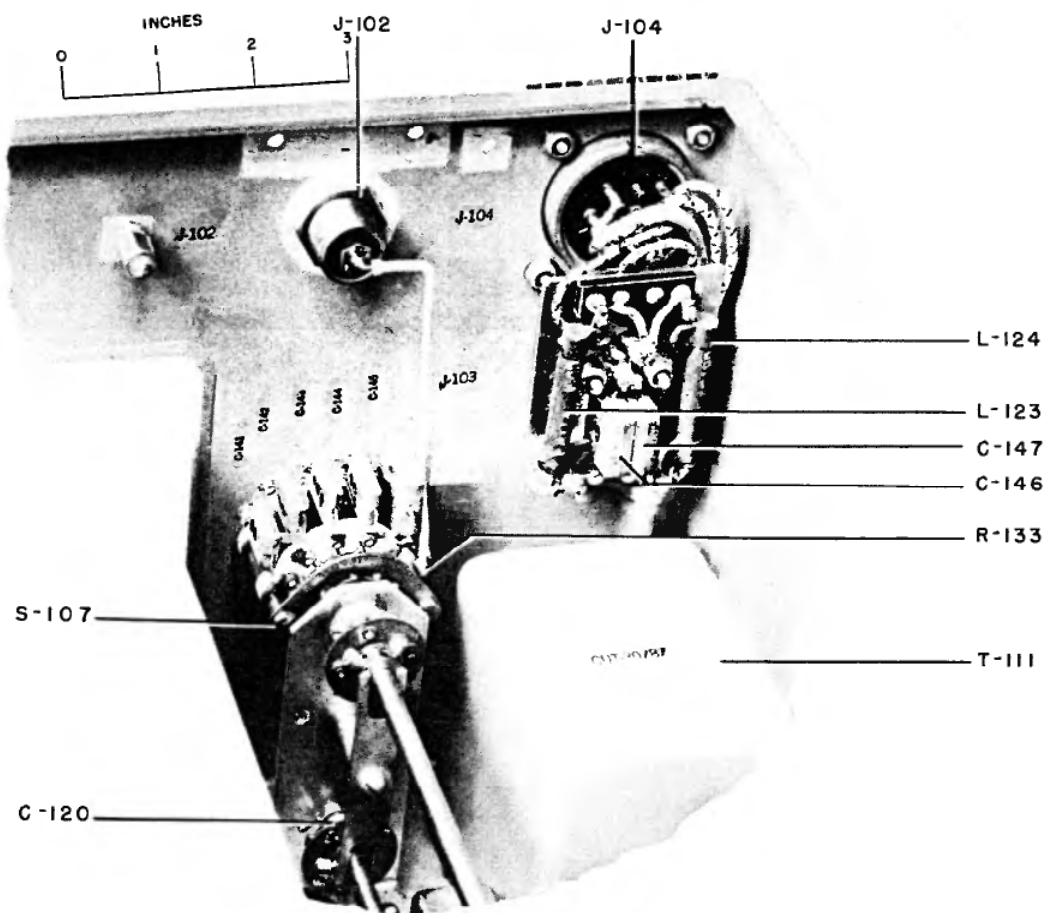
INPUT COUPLING SWITCH AND OUTPUT RECEPTACLE FILTER—COVER REMOVED
